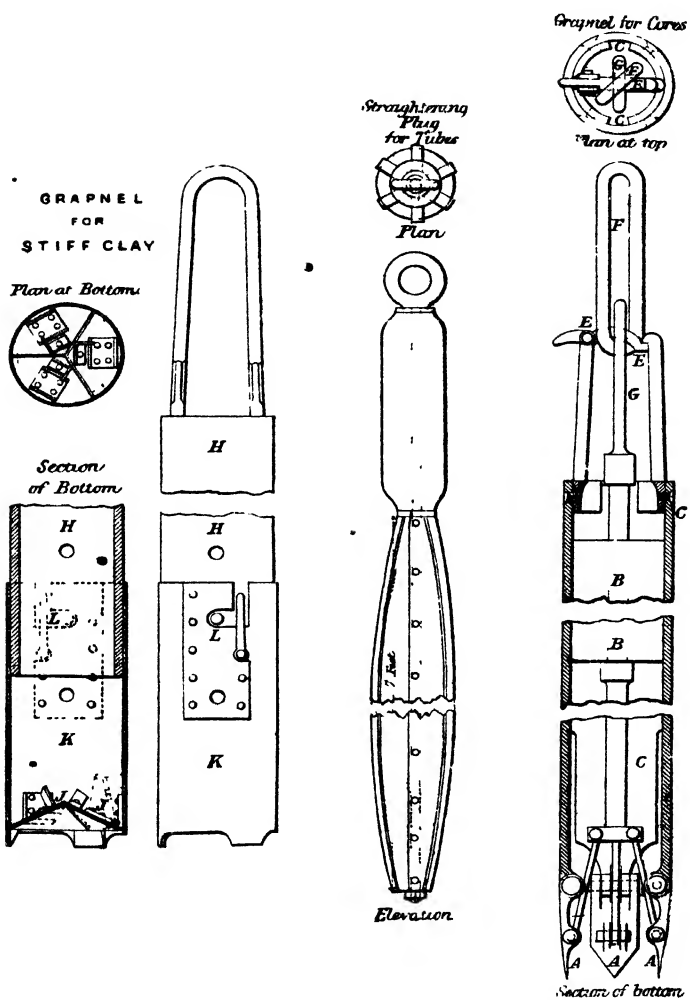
MATHER & PLATT EMERGENCY TOOLS.
